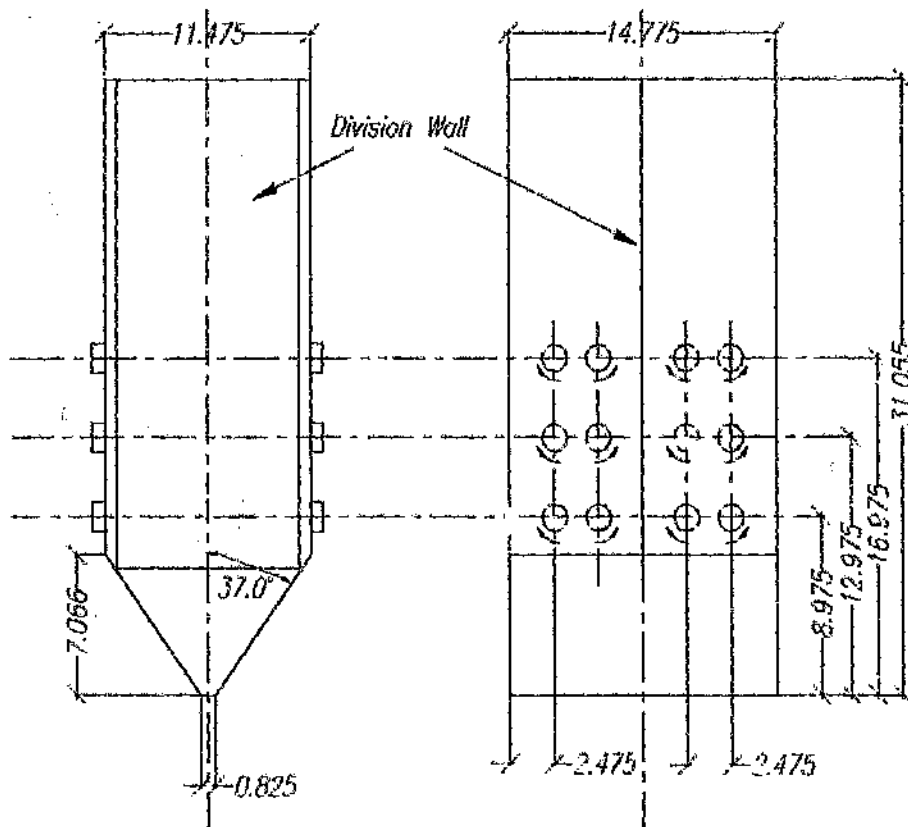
Hendrina Unit 9 Furnace : Vertical Section and View of Front Wall
